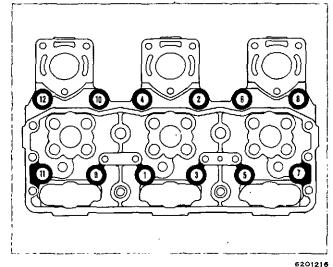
Cylinder head tightening sequence — V12, 5-1/8" bore
